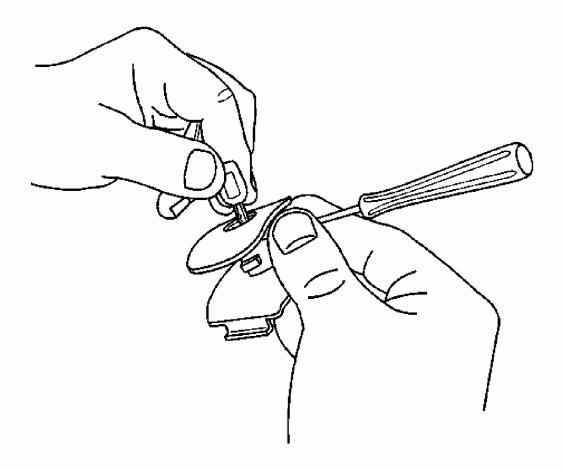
Rotating Key To 5 O'Clock Courtesy of GENERAL MOTORS CORP.
